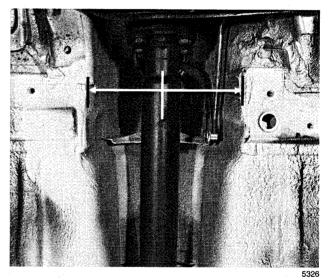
Driveshaft side-to-side alignment. Driveshaft should be centered in driveshaft tunnel.
